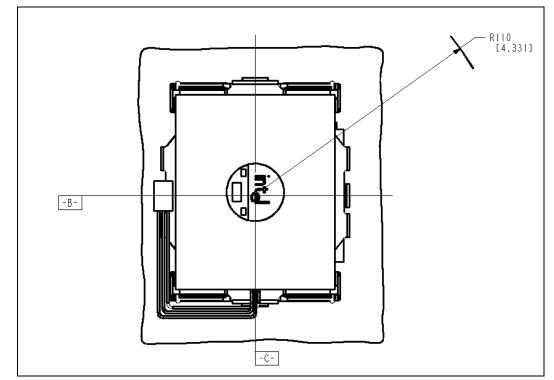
Acceptable System Board Power Header Placement Relative to Processor Socket
